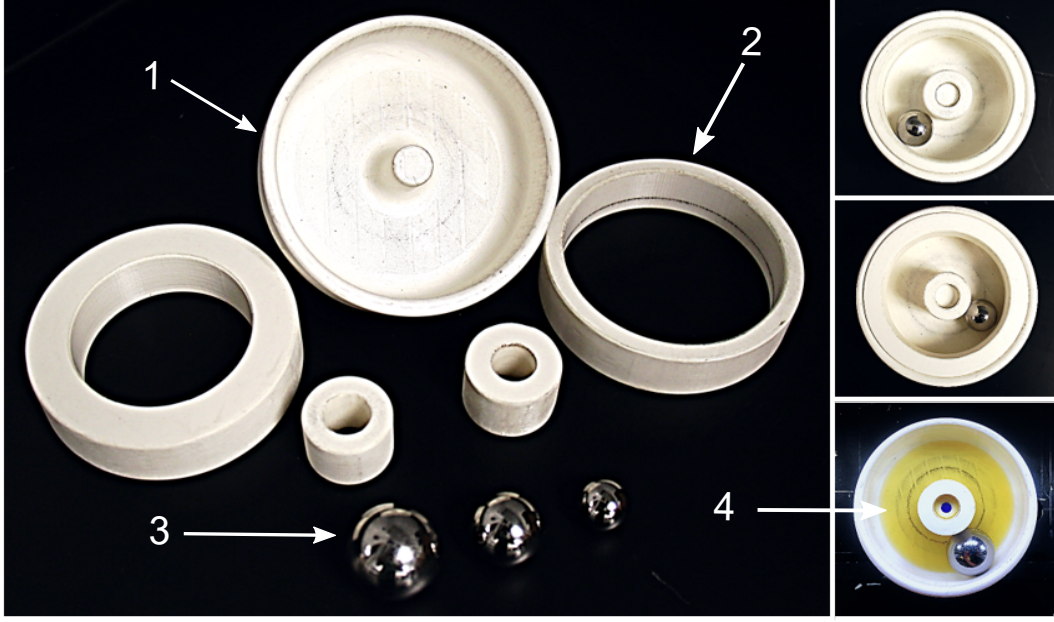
Exploded view for NES parts : (1) NES main body, (2) various size bushings, (3) metal balls, and (4) a lubricating fluid.
